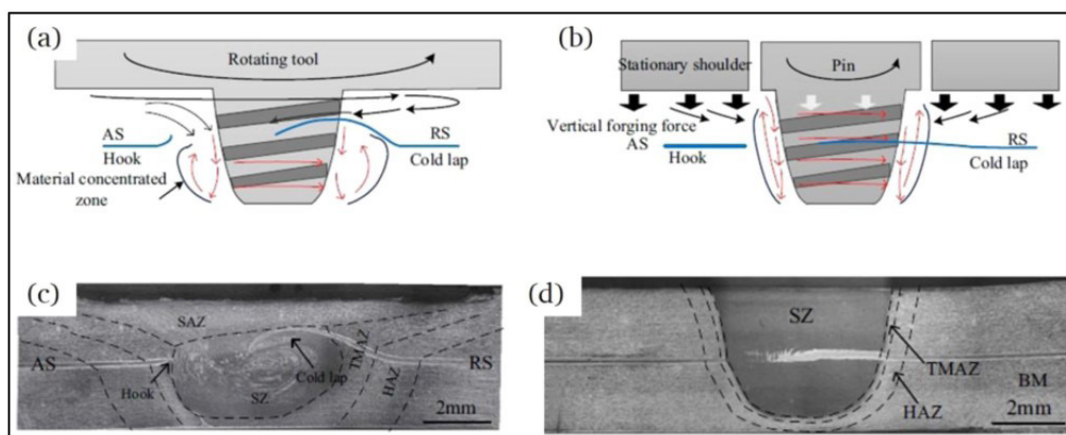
Material flow pattern in the lap welding of AA2024-T6 alloy using traditional FSW (a) and (c), and NRSA-FSW (b) and (d) [116].
